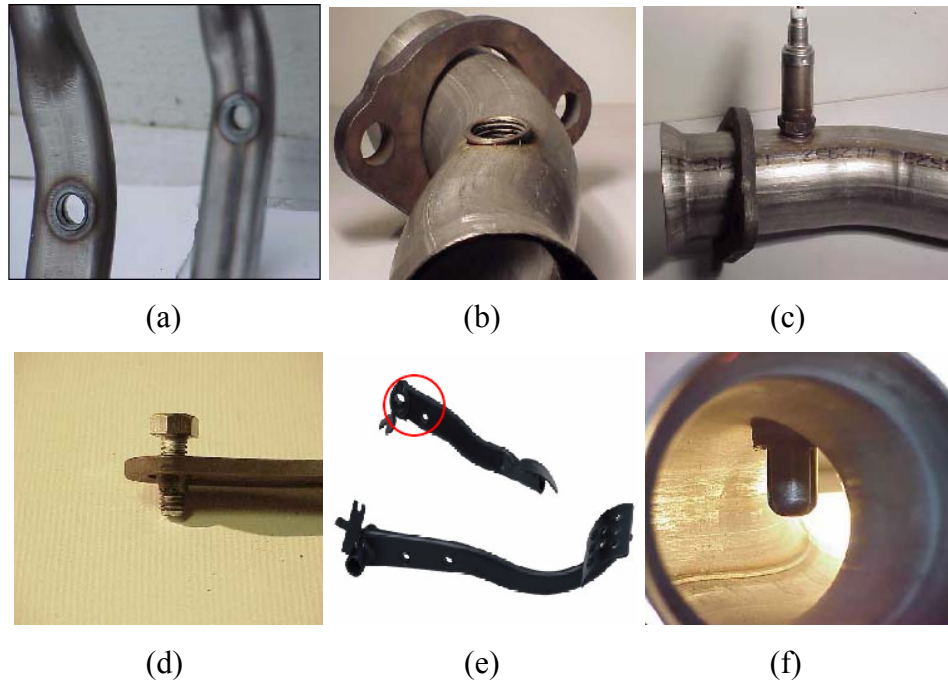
Automotive applications of friction drilling including (a) seat frame, (b) exhaust O₂ sensor boss, (c) exhaust part, (d) seat handle, (e) foot pedal, and (f) oxygen sensor [19].
